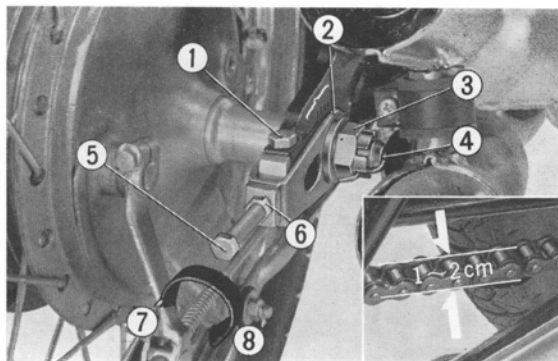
① Fork cap bolt ⑤ Adjust bolt
